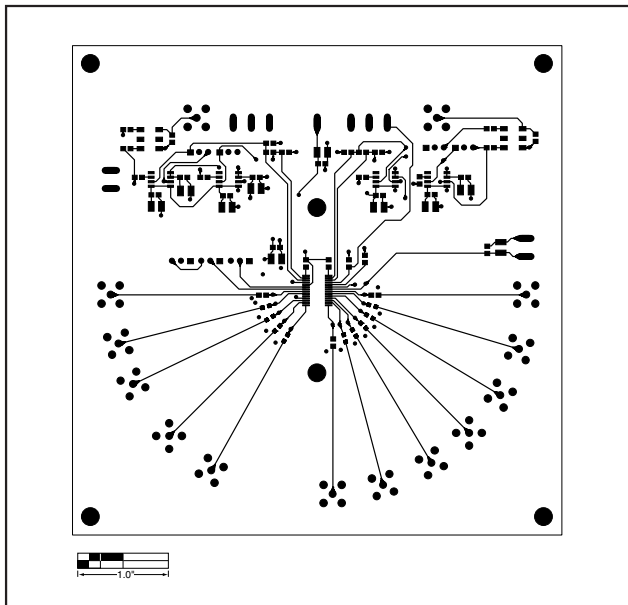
MAX5183 EV Kit PC Board Layout—Component Side (Layer I)
